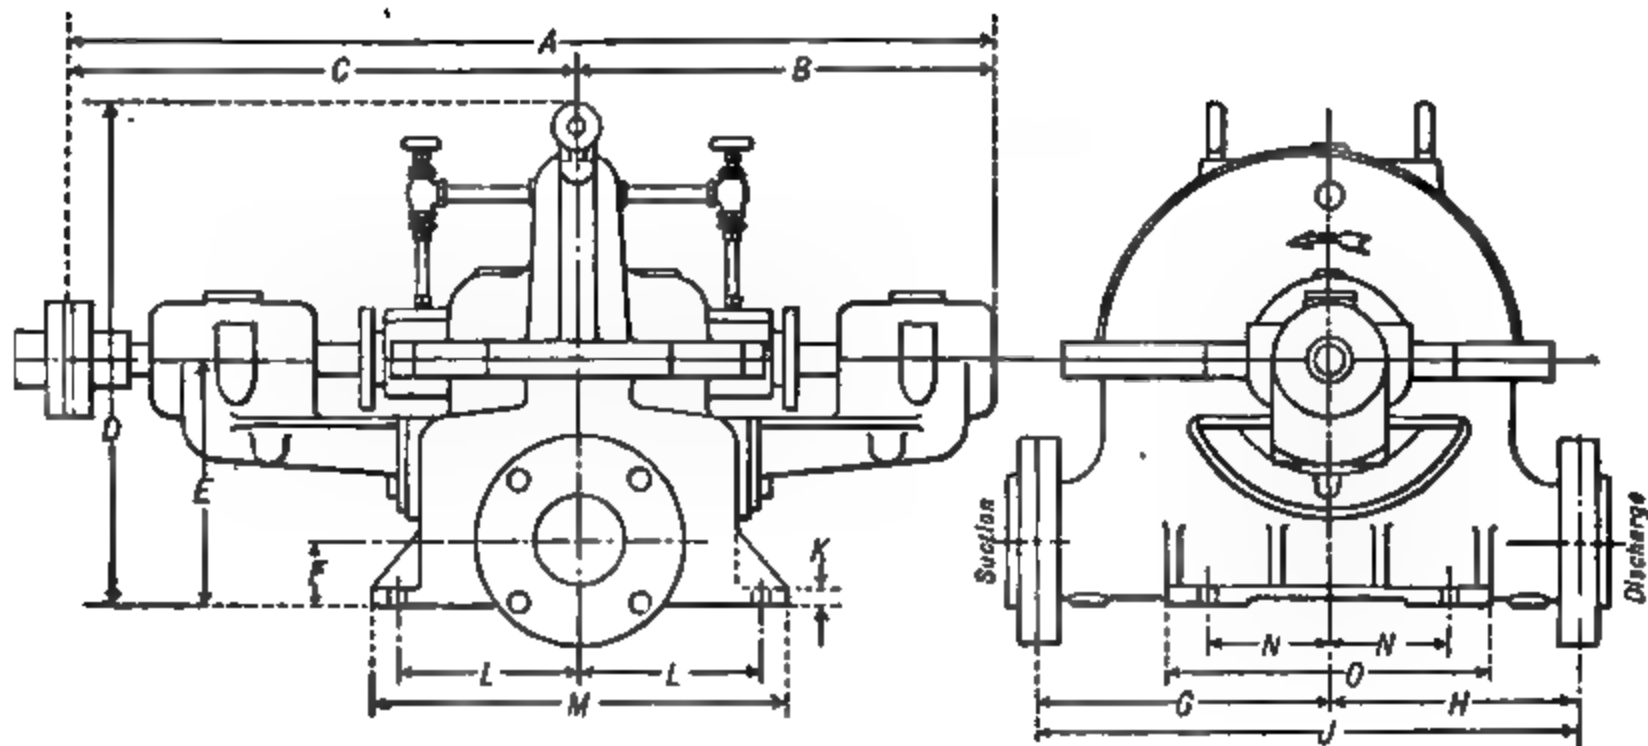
SINGLE-STAGE DOUBLE-SUCTION GOULD PUMP.
